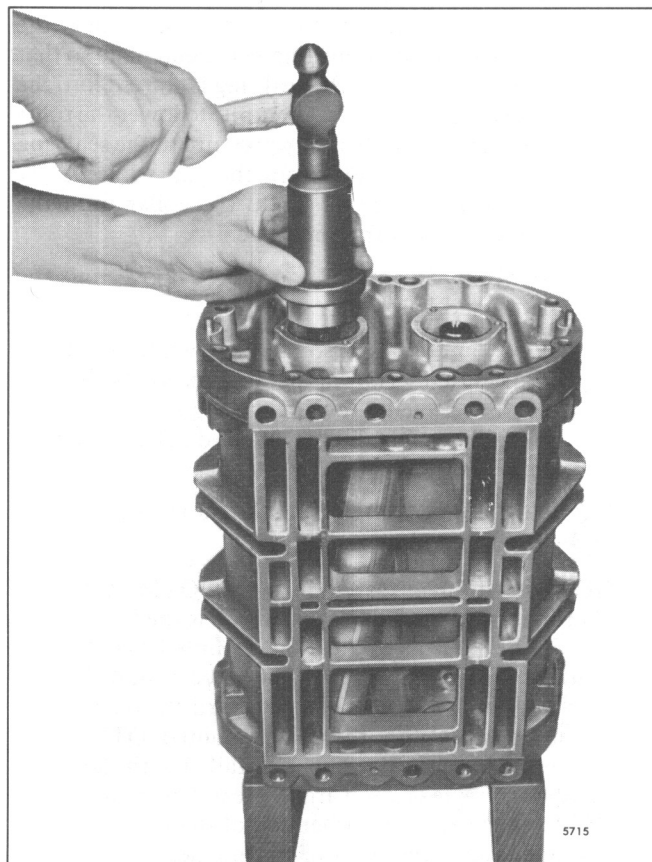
Installing Roller Bearings on Rotor Shafts and in Front End Plate with Tool J 6270–13
